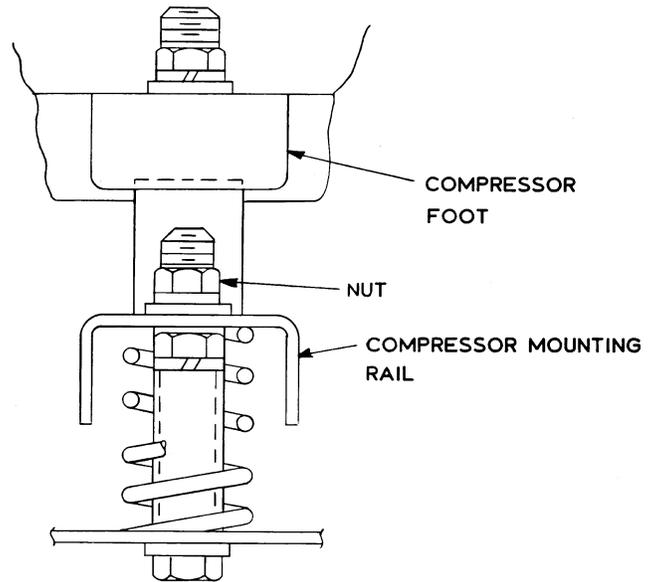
Front View of Compressor Mounting Rail Assembly — Size 105 Units
